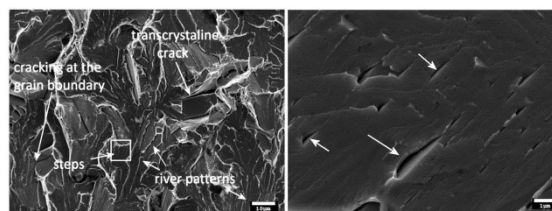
Fracture surfaces from three-point bend testing of G17CrMo5-5; a – characteristic fracture features, b – tongues.
